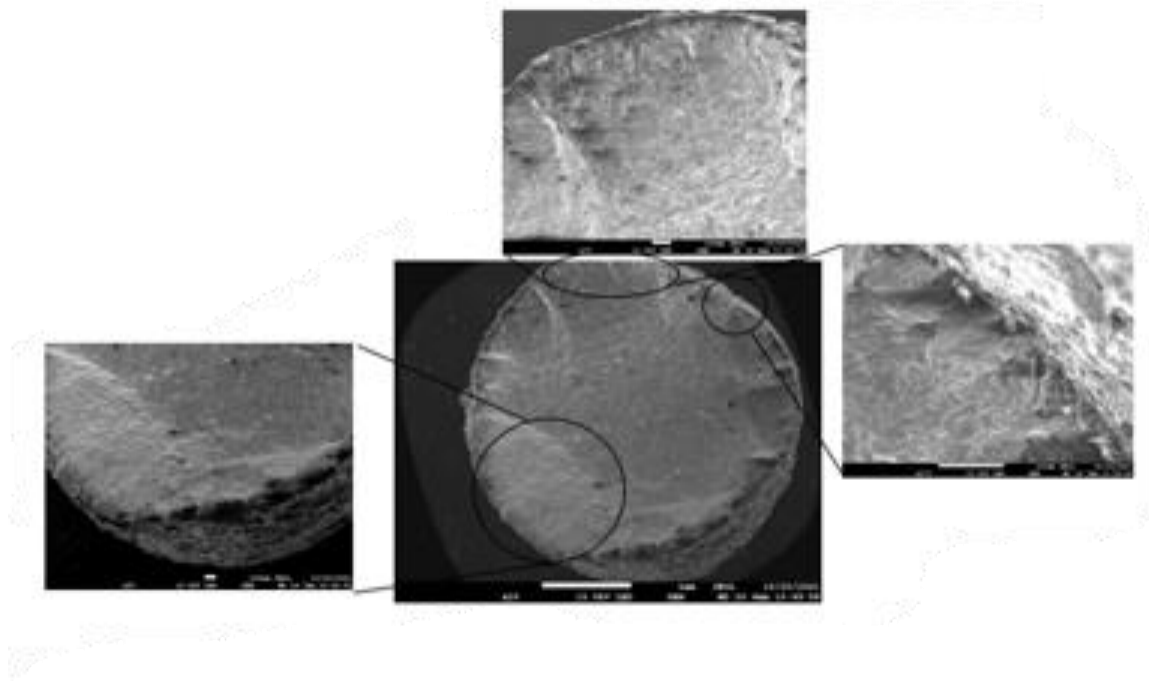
Fractography of fatigue sample 3 fabricated with 230 W.
